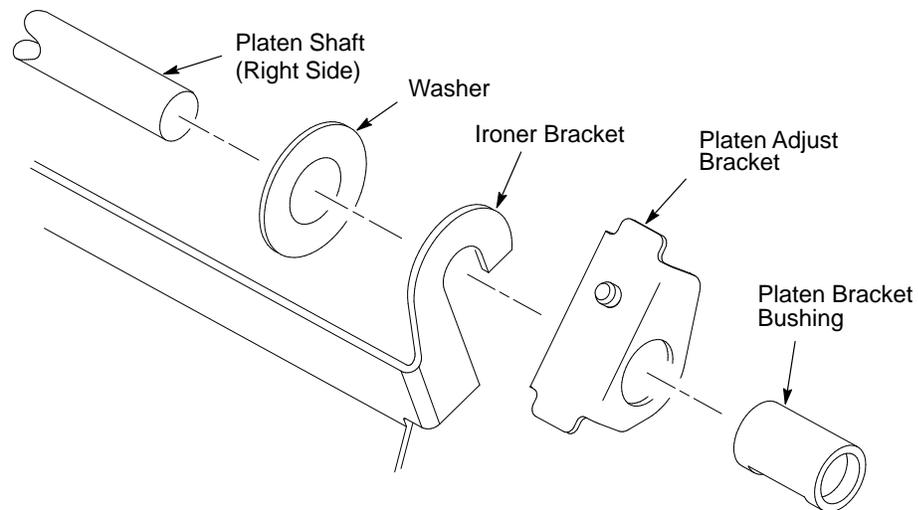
Installation of Platen Adjust Bracket Bushing
